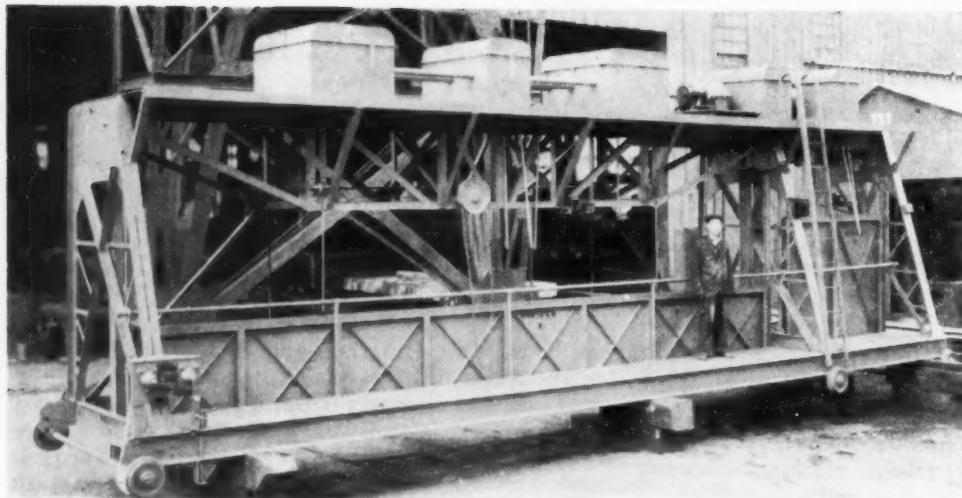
VIEW OF SHOP-ASSEMBLED OSAGE RAKE, HOIST, AND CARRIAGE
